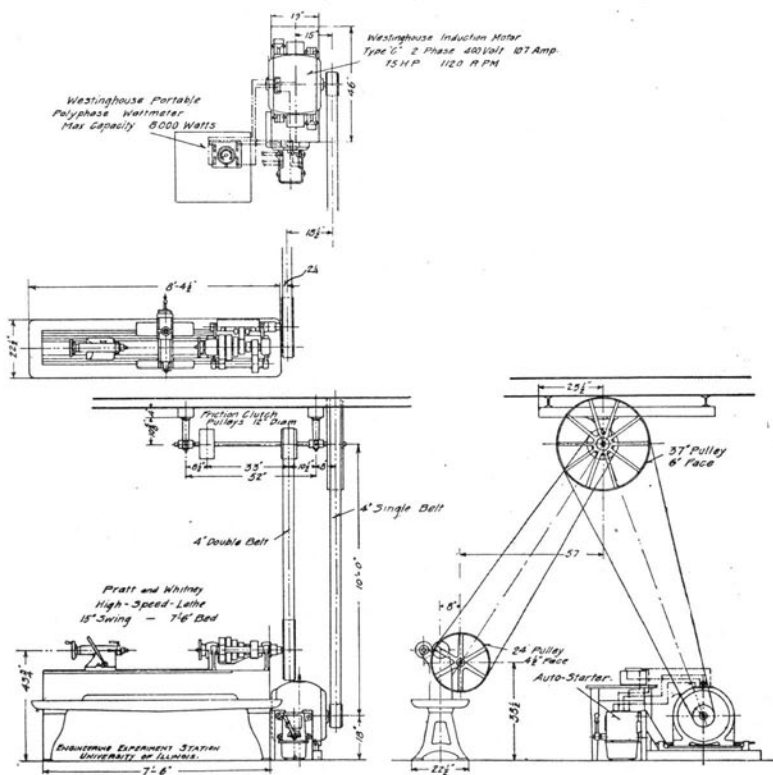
GENERAL ARRANGEMENT OF APPARATUS USED IN THE TESTS WITH HIGH-SPEED TOOL STEELS
